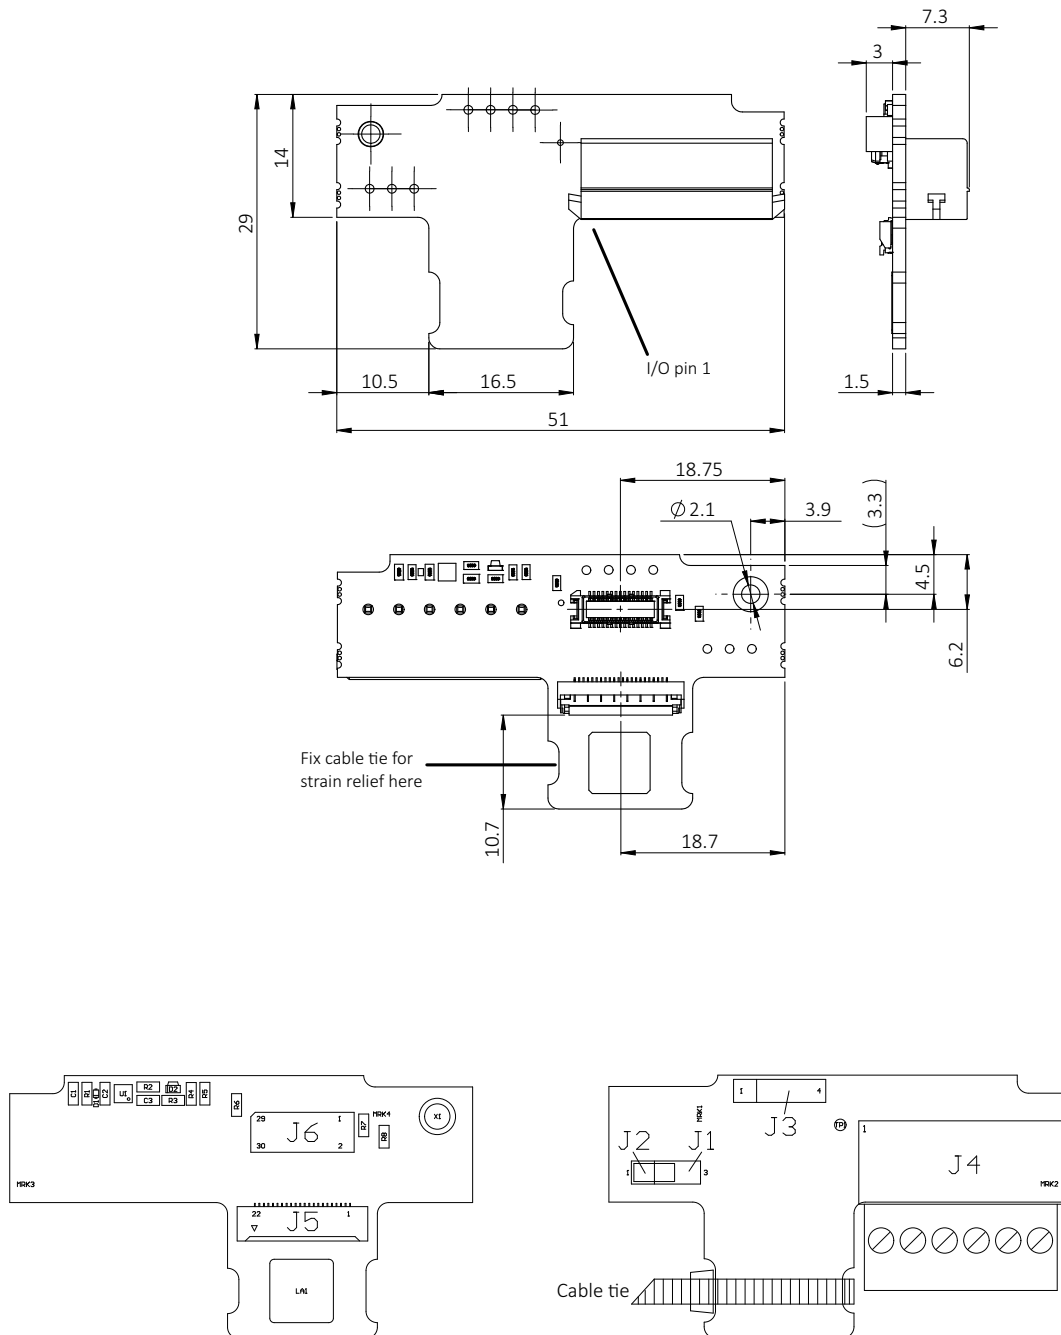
Adapter for Nitrogen6_MAX dimensions and PCB layout
